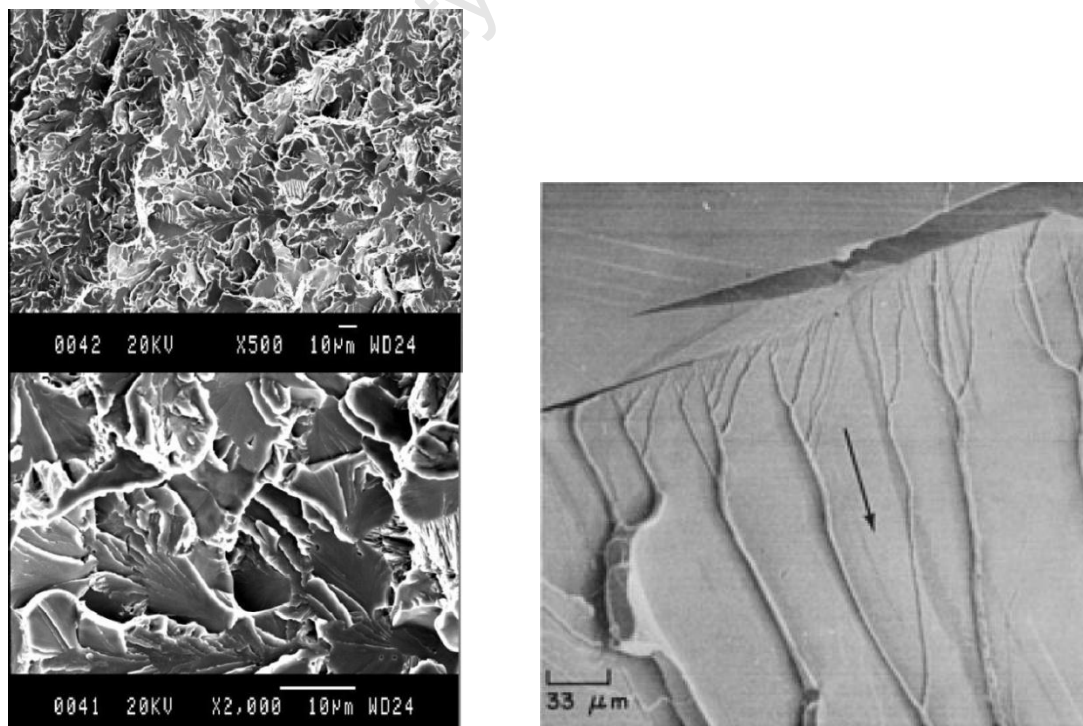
Fractographs of brittle material show river patterns [79;80]
